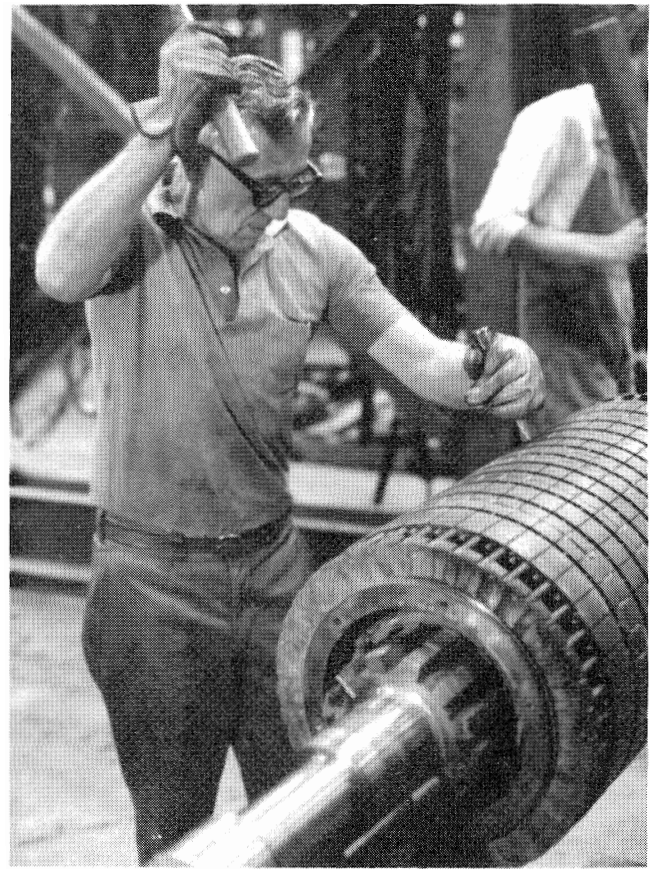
Service Shop Worker Attempting to Tighten Rotor Cage by Swaging Rotor Bars. Swaging is the act of mechanically displacing bar material in a manner such that it becomes tighter in the slot.
